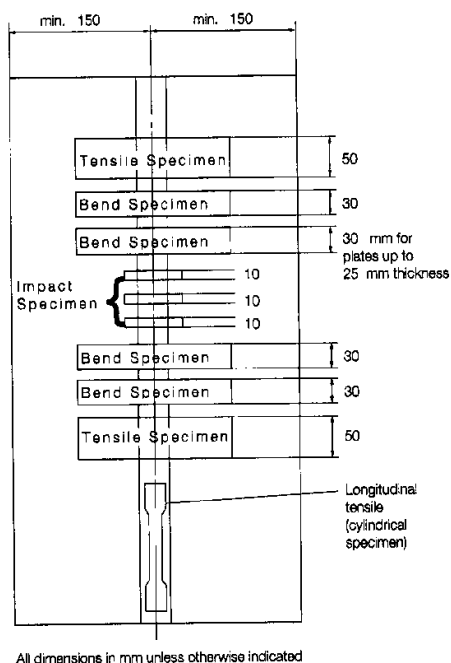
Butt weld test assembly (two-run technique)
